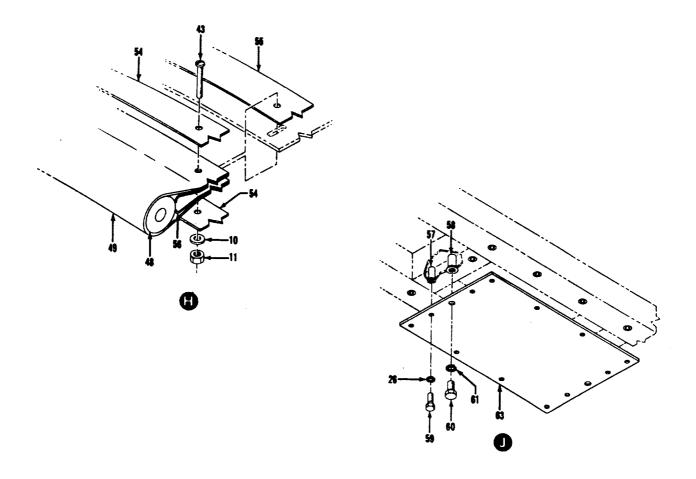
Hood Adapter Assembly (Sheet 3 of 6)
